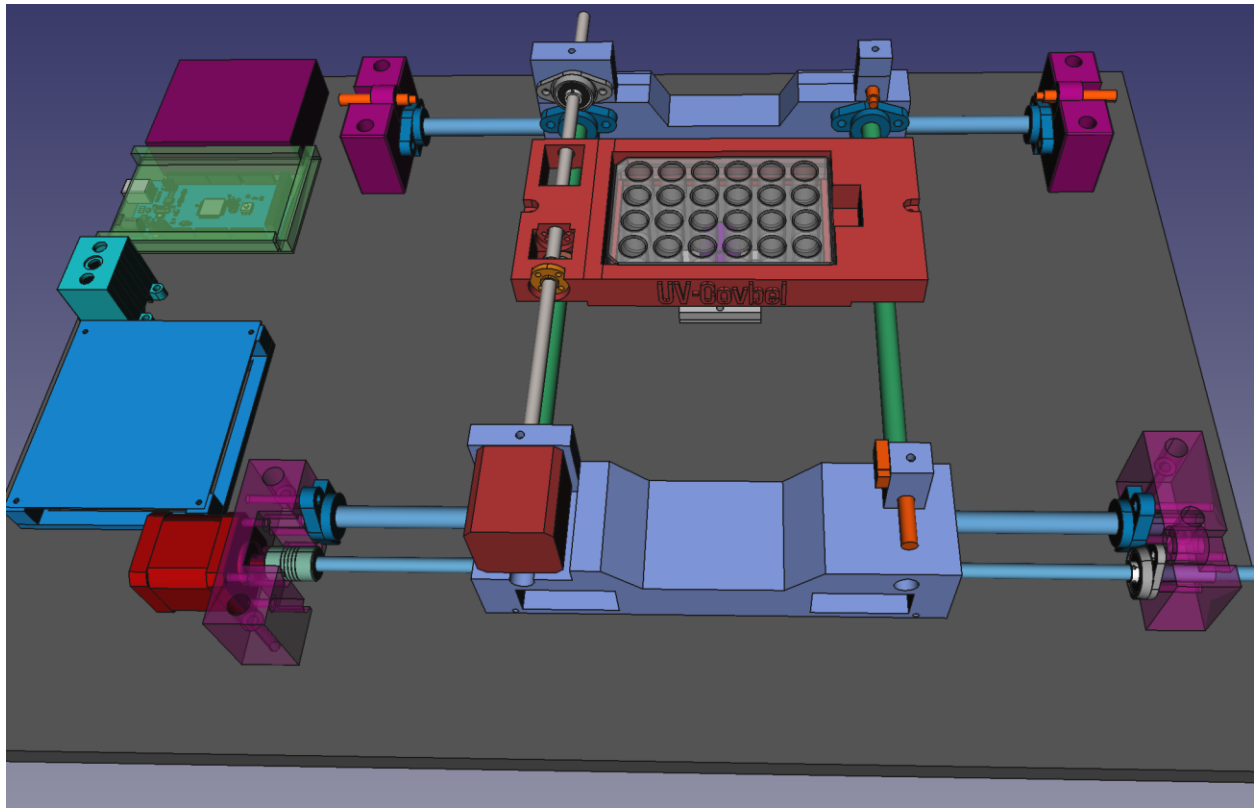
The final assembly was created and visualized by FreeCAD. Stepper motors (red), non-moving 3D printed parts (purple), moving 3D printed parts (cyan), Arduino (green), plate holder in the middle, above the LED, end stop switches (orange)
